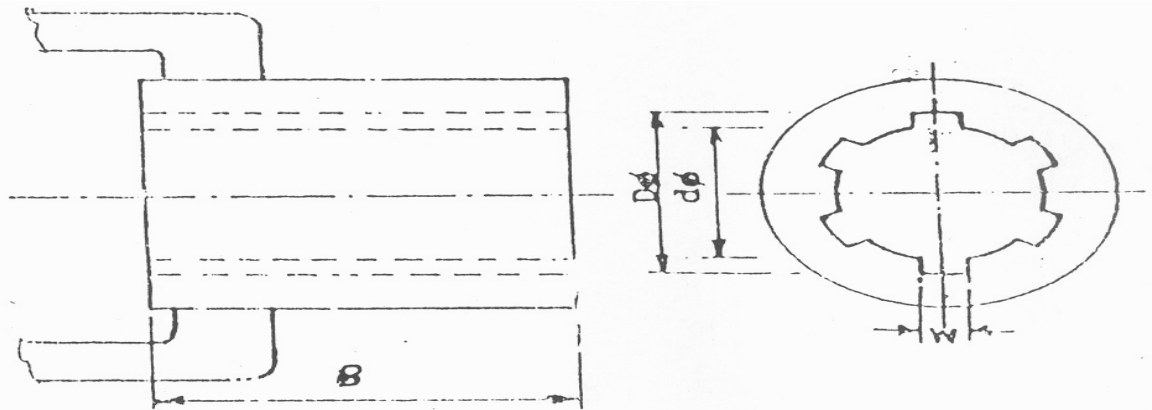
Propeller Shaft Insert Dimensions, (mm)
